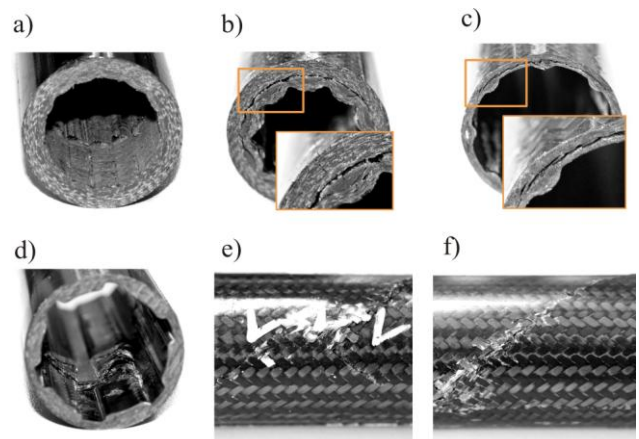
Experimentally observed failure phenomena: a) tooth baring b/c) interlaminar shear d/e) shaft fracture at the end of the load introduction f) torque failure of the shaft body
